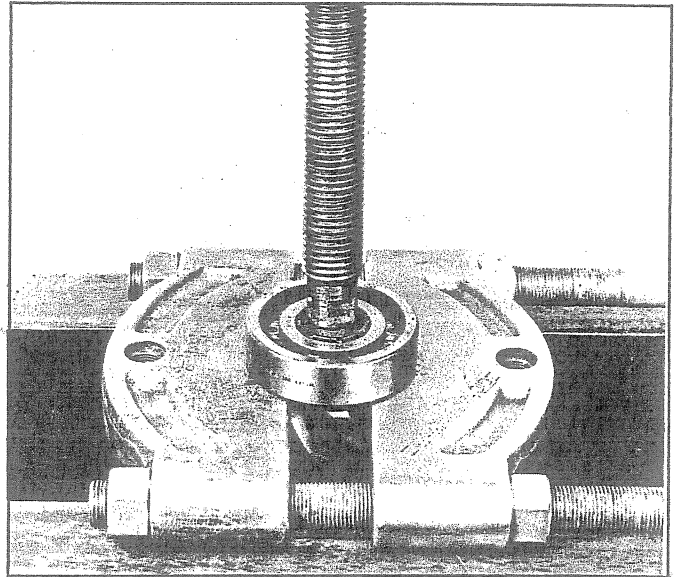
Pressing Inner Bearing from Pinion Shaft
